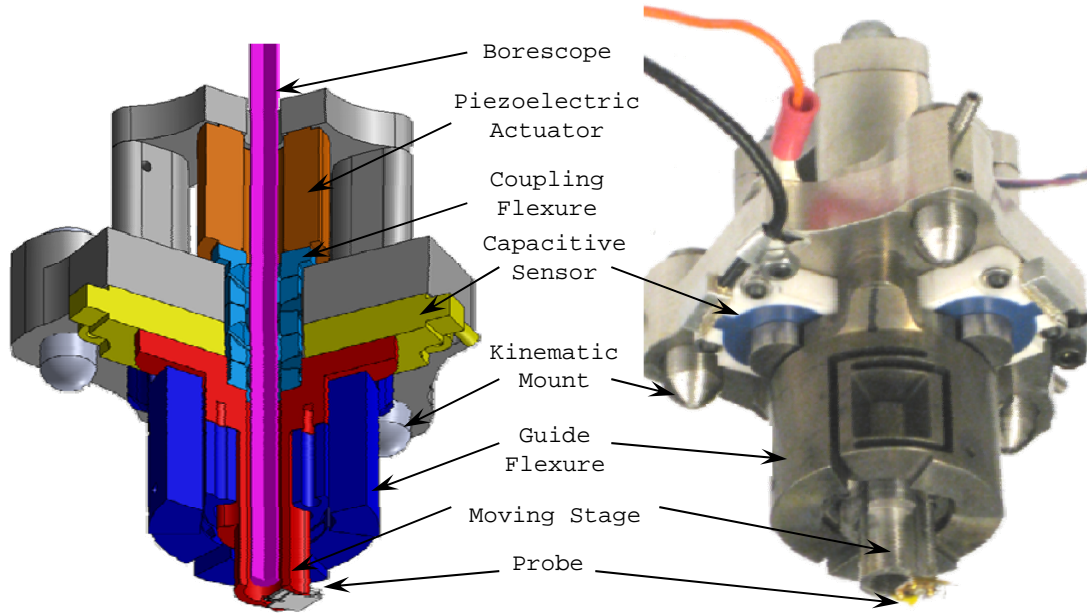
Photo of the assembled HAFM (right) and cross-sectioned CAD model of the HAFM (left).
